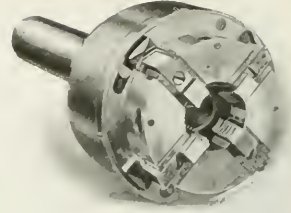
View of Chaser Guides with Chasers and Carriers in Place
